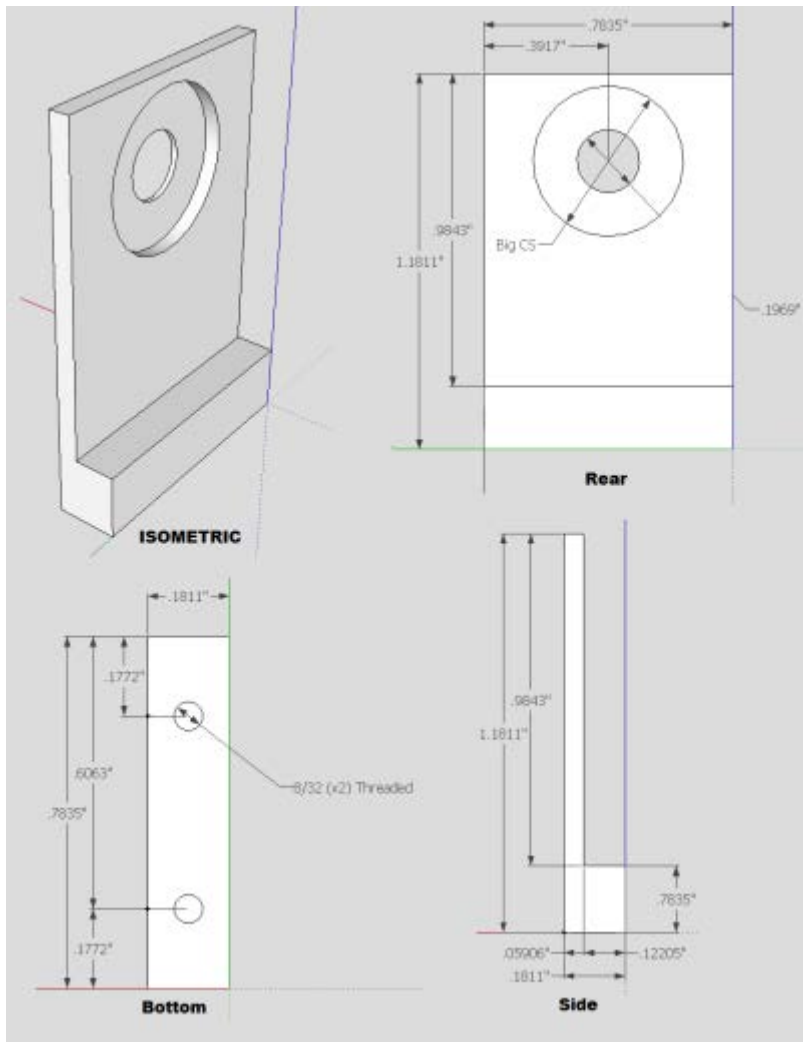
Detailed diagram for updated heat sink design. This version features a thinner mounting surface and a counterbored pump window to fit over pump lens mount.
